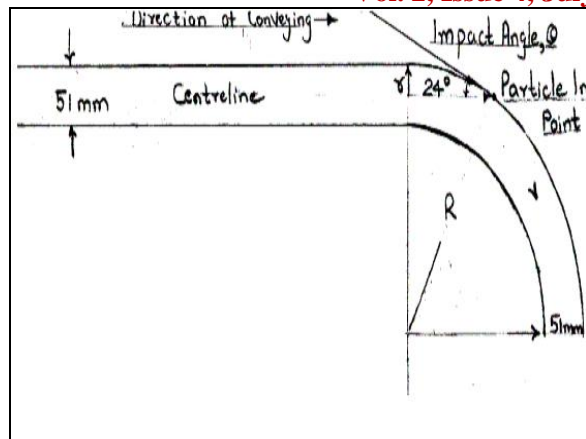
Dimensional Sketch of 51 mm Bore Bend
